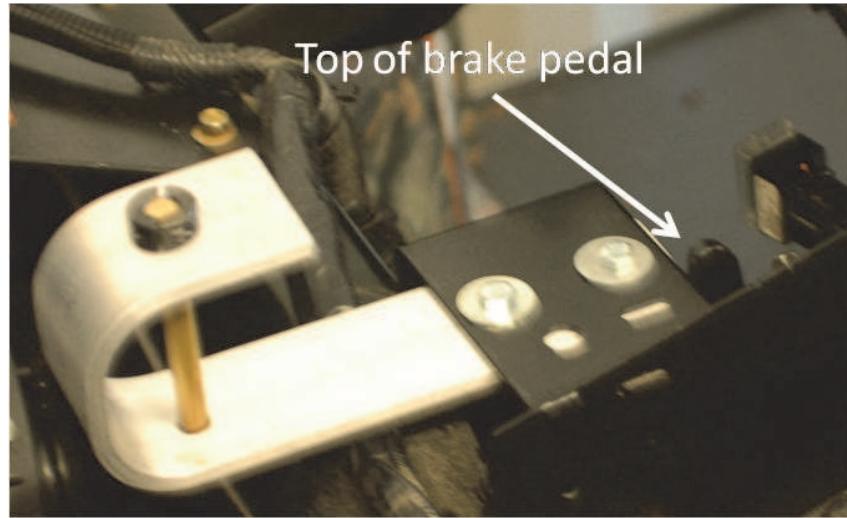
The actuator mounting bracket mounted to the vehicle frame.
